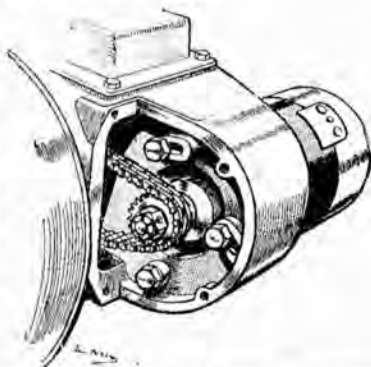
Adjustment of the dynamotor driving chain by swinging the unit on the lowest securing bolt.
